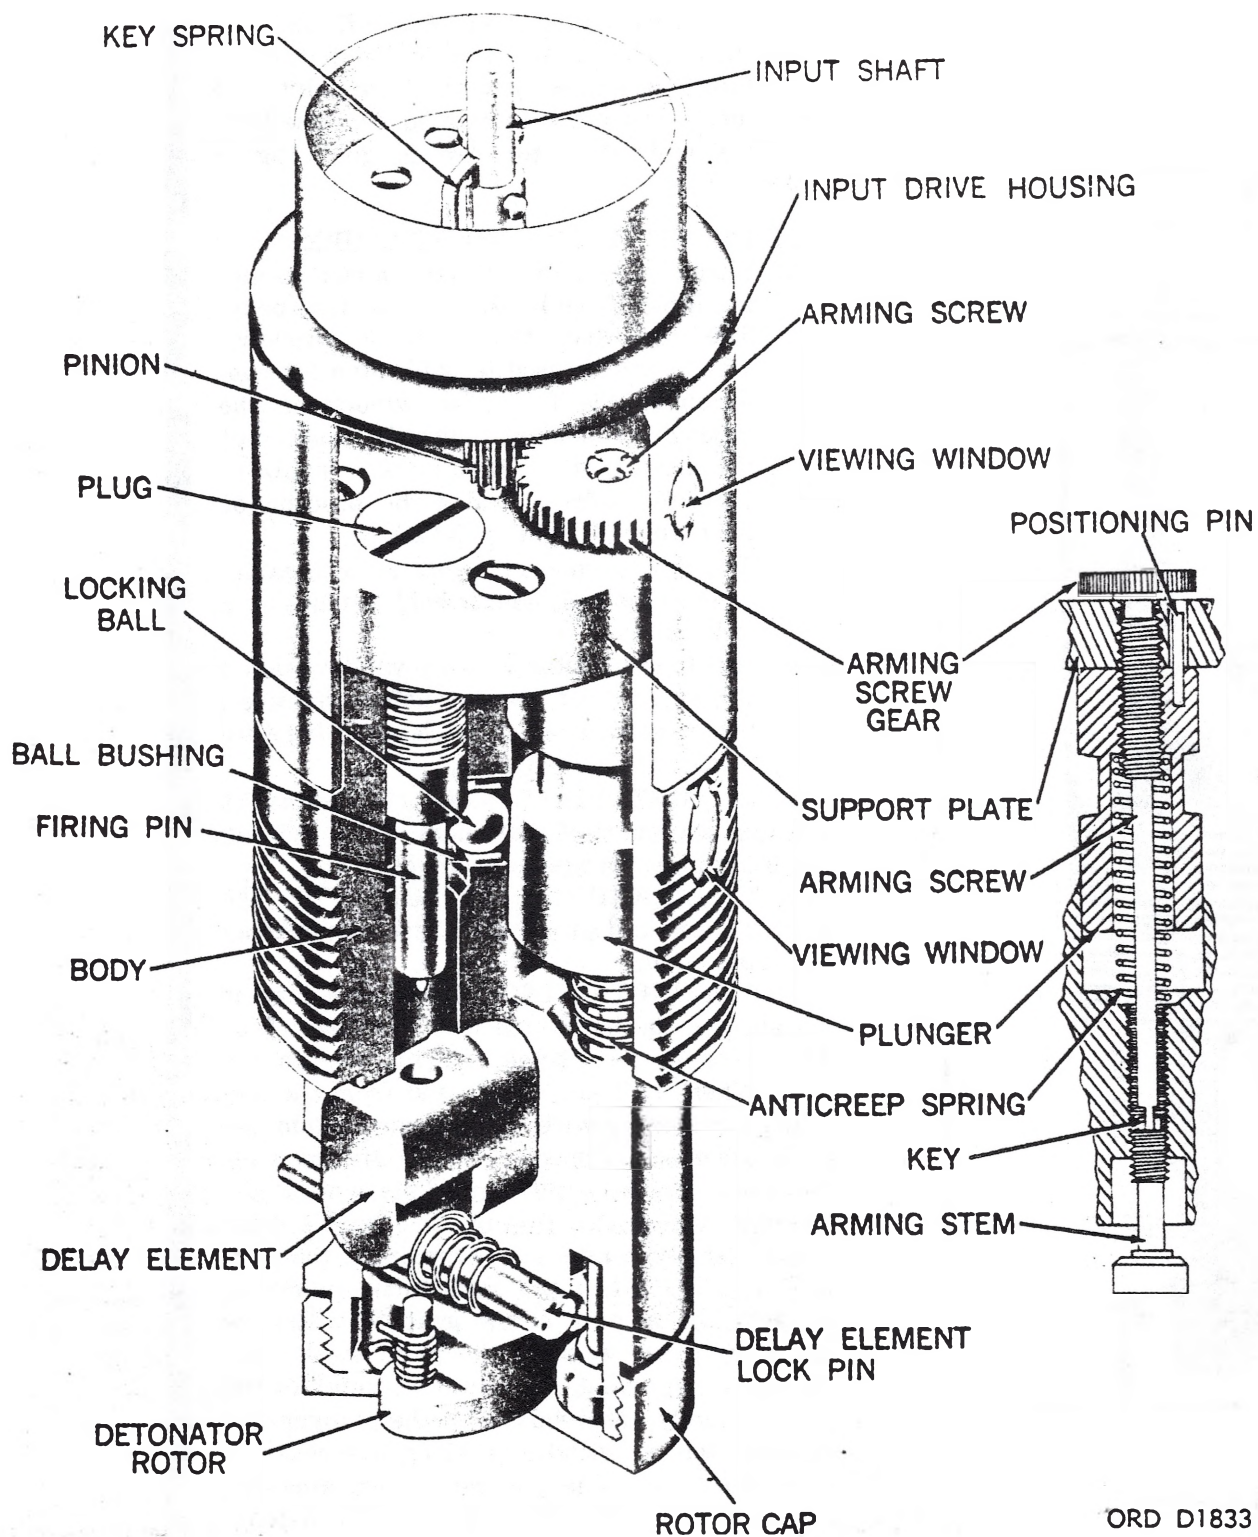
E Cutaway View of the M906 Fuze in the Unarmed Condition
